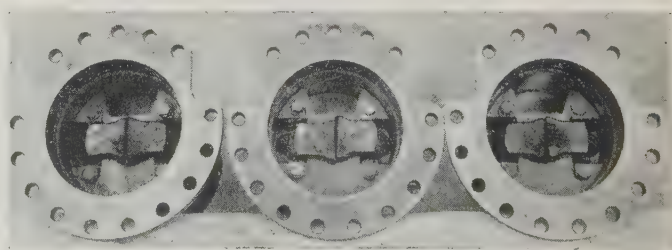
(right). Top view of 3 explosion chambers after tests
